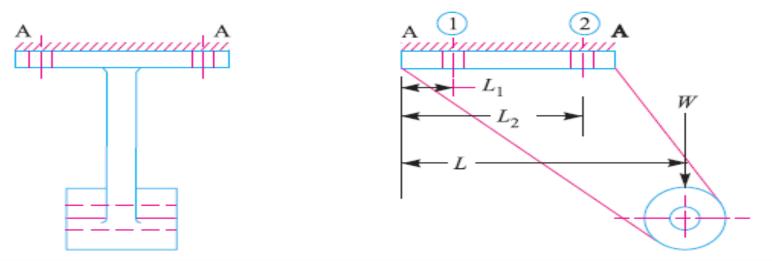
Eccentric load acting parallel to the axis of bolts.
